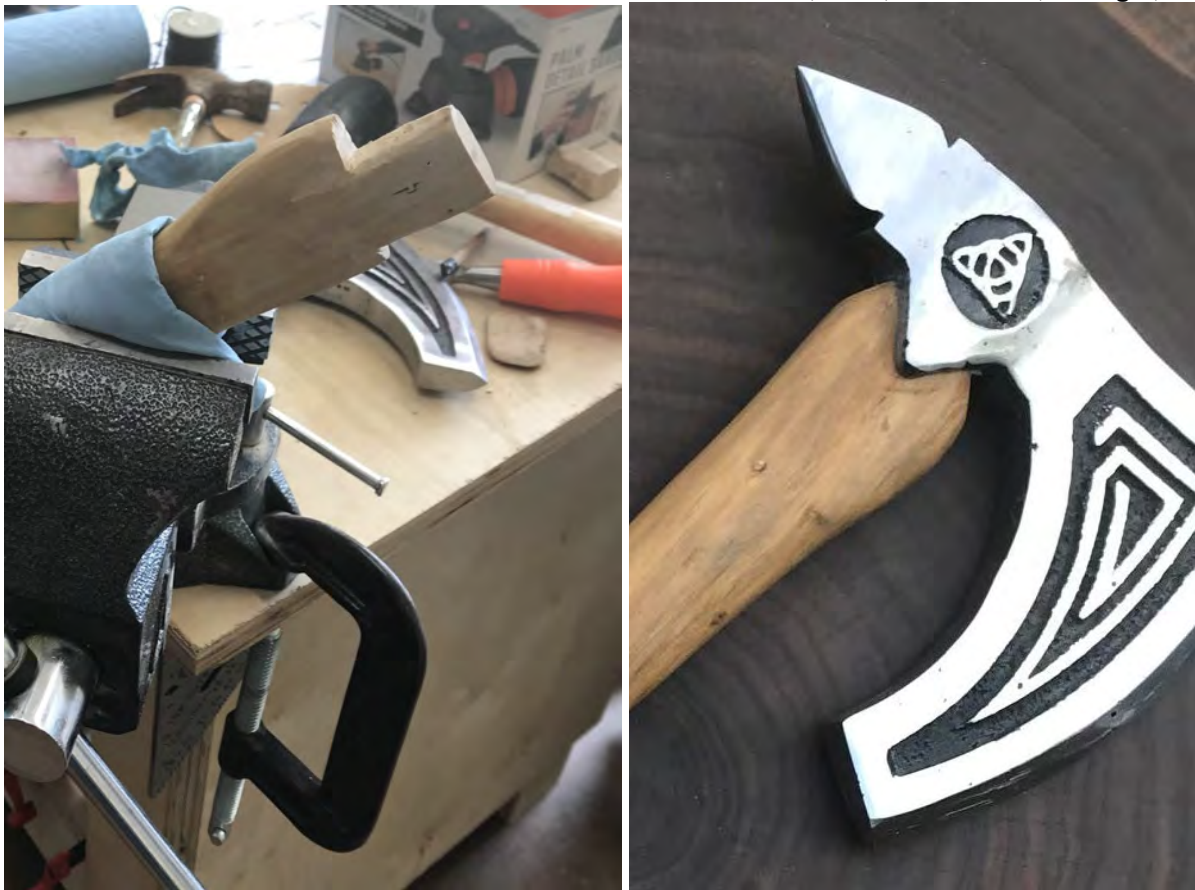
The shaft without the linseed oil finish and shoulder/ heel chamfer (left); The shaft with shoulder/heel chamfer and linseed oil finish (right).
